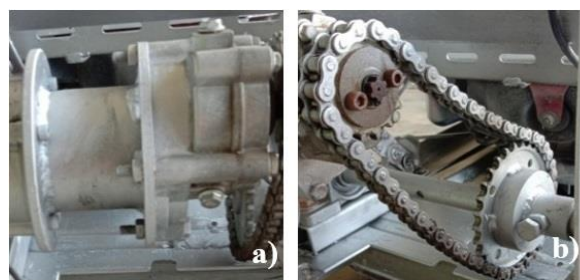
Transmission system a) gear reducer b) chain and sprocket.
